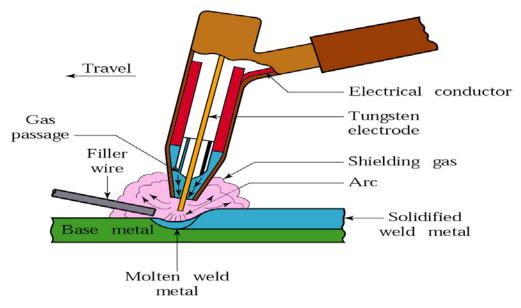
Gas Tungsten Arc Welding (GTAW)
